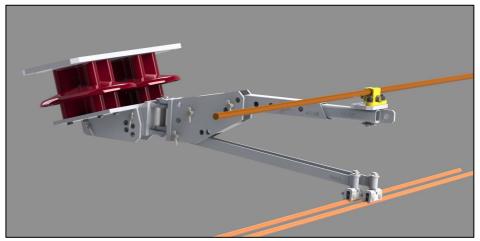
CAD View of Mark-3 Tunnel Cantilever without Heel Adjuster
